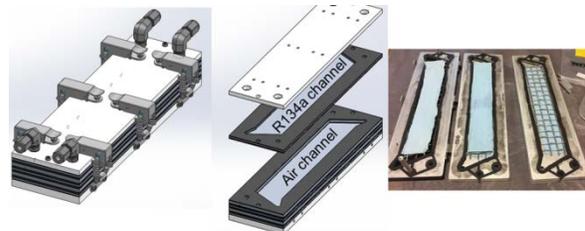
Custom built flat plate heat exchanger. On the left is the heat exchanger fully assembled, in the middle is an exploded view, and on the right is a photograph of the heat exchanger disassembled.
